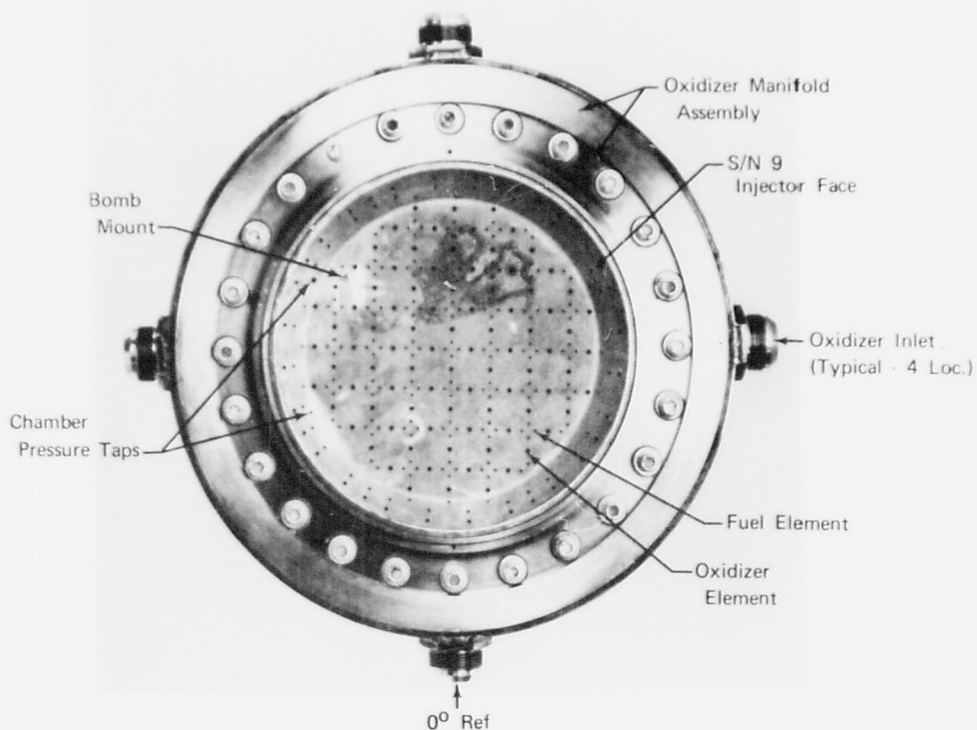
Modified Agena S/N 9 Injector Assembly - FE 83813A
